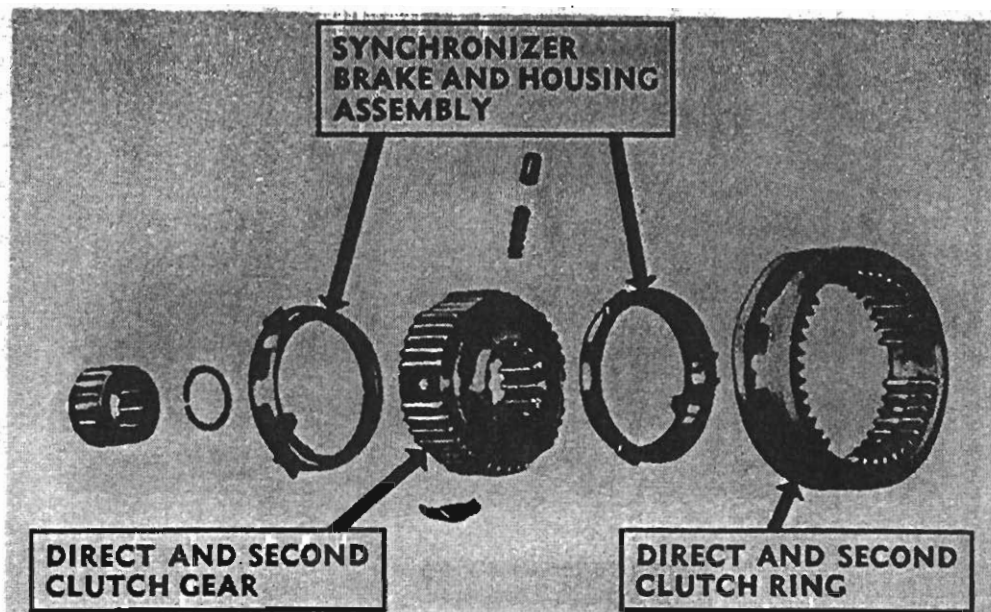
Exploded View of Clutch Gear and Synchronizer.
